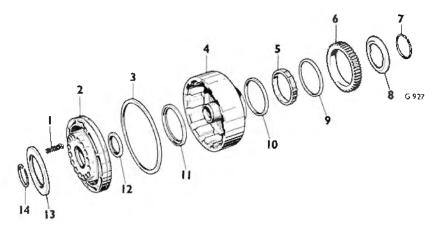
Direct clutch and intermediate sprag assembly — exploded
